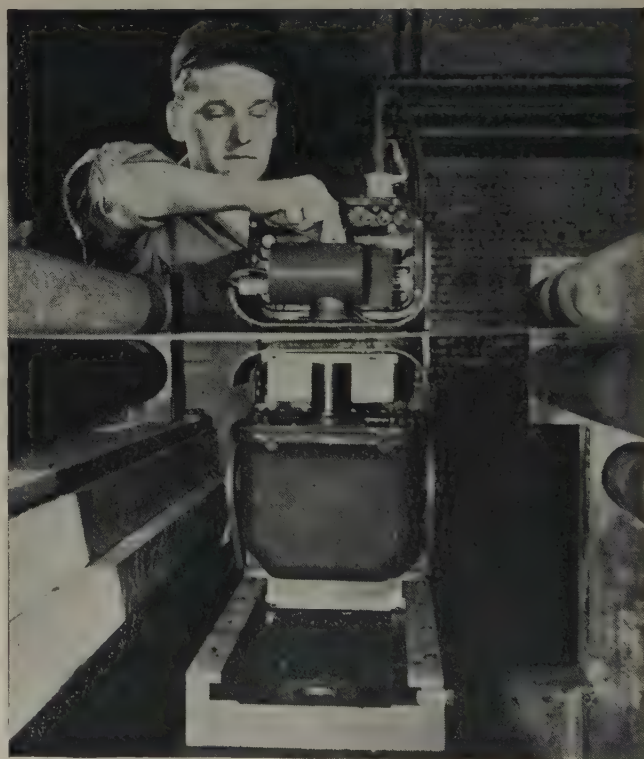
Operator sliding sample into place in X-ray thickness gauge
